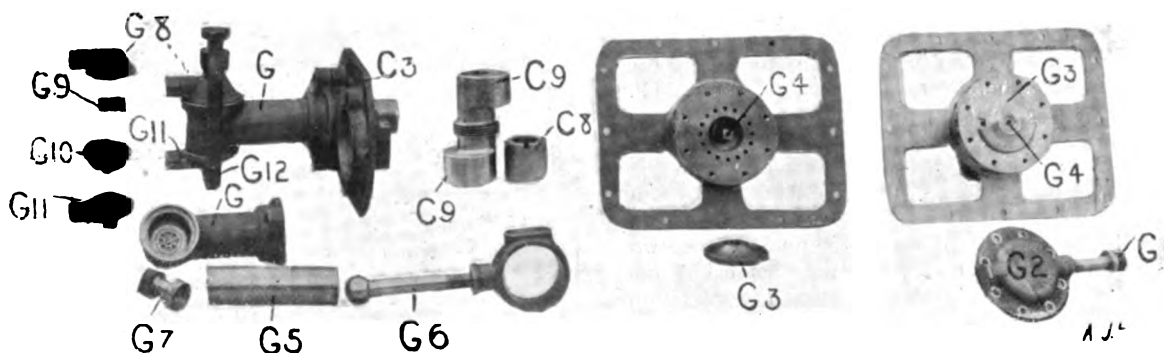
One of the Clarkson feed-pumps fitted to its pump-plate, with a pump-cylinder, G, a piston, G⁵, a piston-rod, G⁶, a pair of eccentric-blocks, C⁹, and a set of pump-valves arranged alongside it. To the right, are two views of the 16-feed distributor for the lubricating-oil, showing the revolving disc-valve, G³, both detached and in place, and showing the cover, G², of the distributor, separately.
